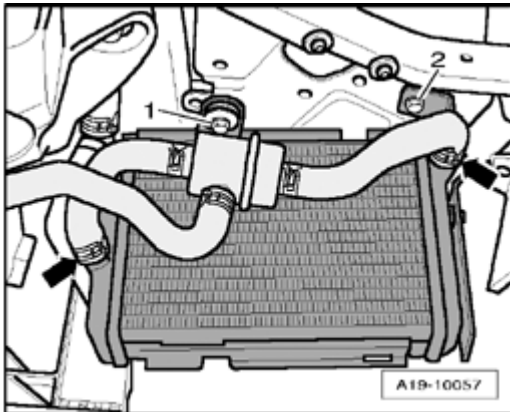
Auxiliary Radiator, Coolant Hoses & Bolts
